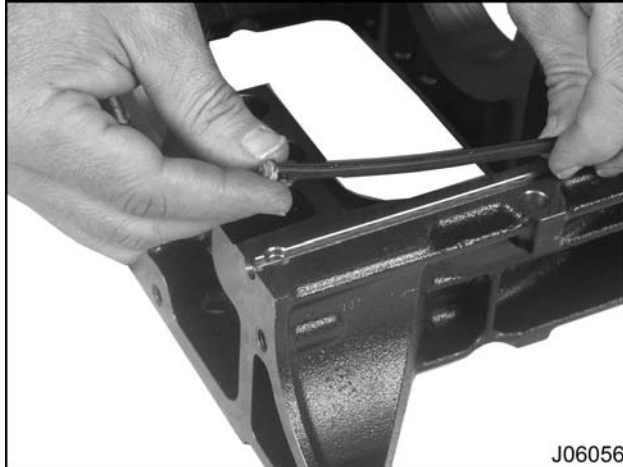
Crankshaft / camshaft / primary balancer timing alignment
